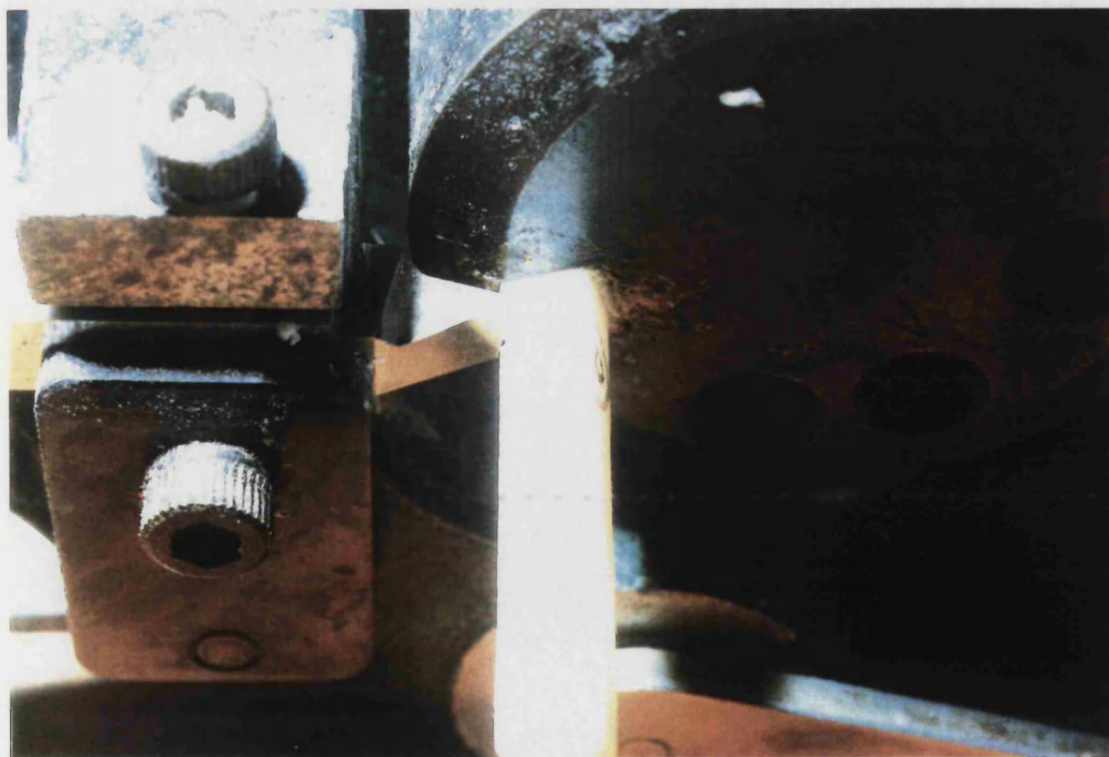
Notching Jig for Rapid Fracture (Impact) Tests - Side View.
